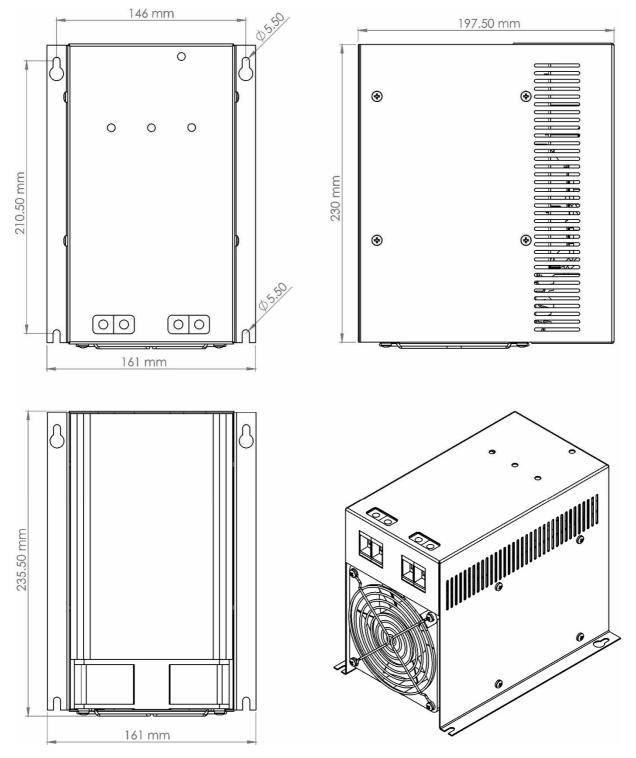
50kVAr and 80kVAr modules technical drawings
